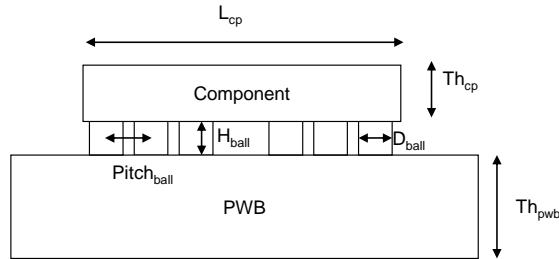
Thermo-mechanical fatigue failure of solder ball interconnections
